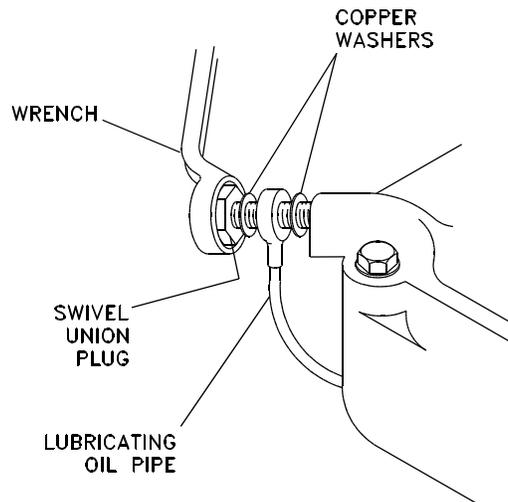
Removing Swivel Union Plug and Lubricating Oil Pipe
